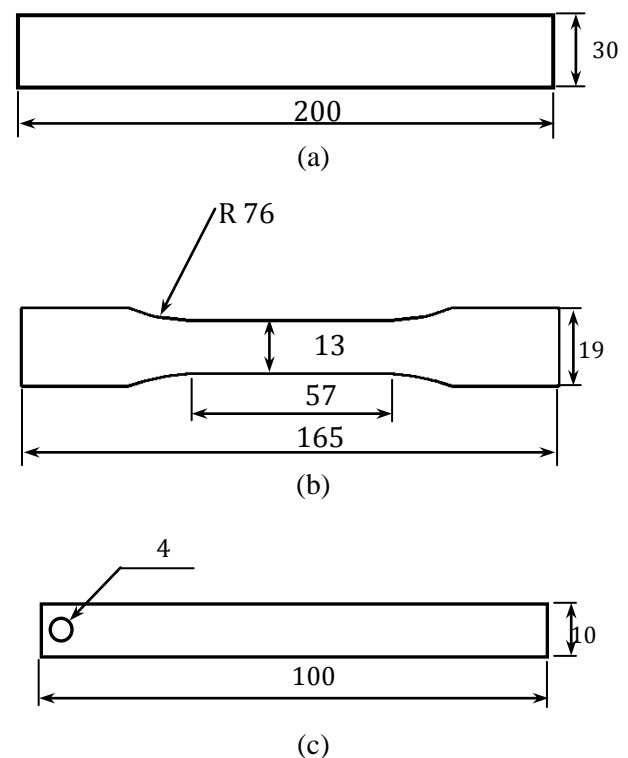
Schematic diagram for [all dimensions in mm] with thickness of 4 mm for all specimens (a) Tensile test specimens (ASTM D 3039) [6], (b) Tensile test specimens (ASTM D 638) [7], and (c) Fatigue test specimens [8].
